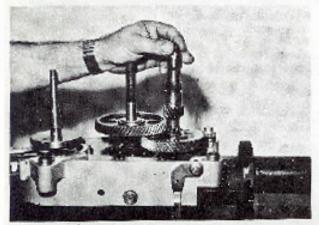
Remove the driven shaft from the rear gear/shaft assembly.
